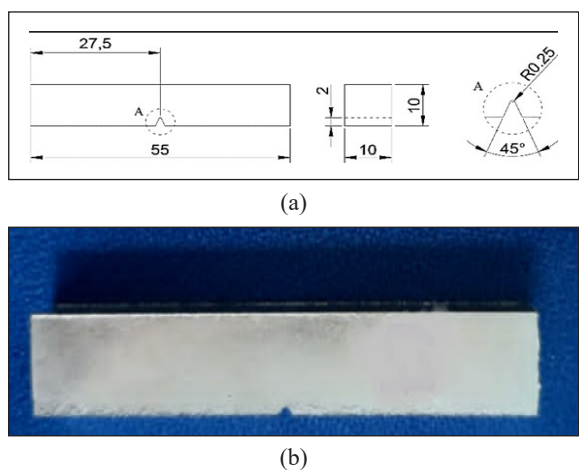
The (a) measurement and (b) shape of the impact strength test specimen (unit dimension = mm)
